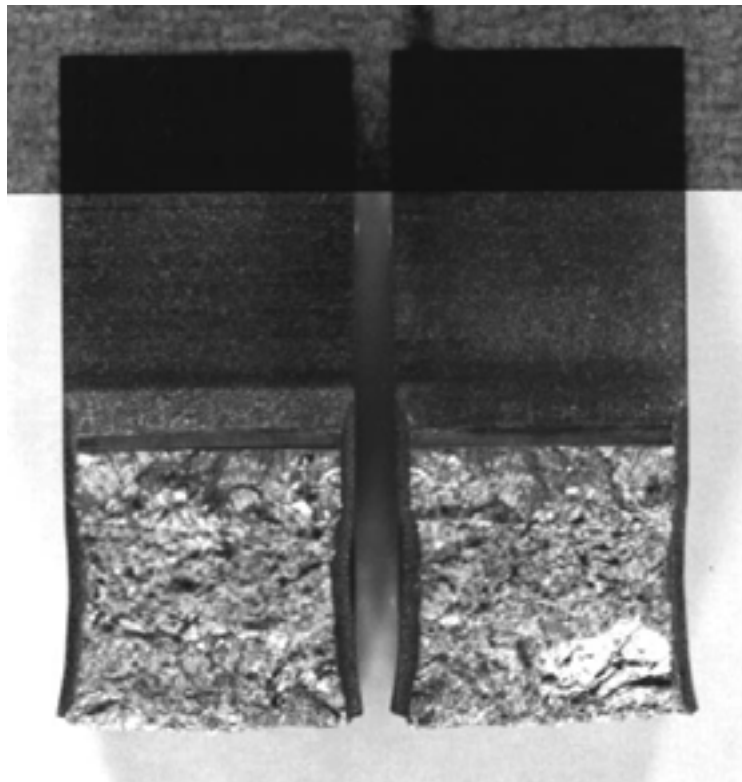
Fracture surface of specimen 75-04T tested at 288°C
